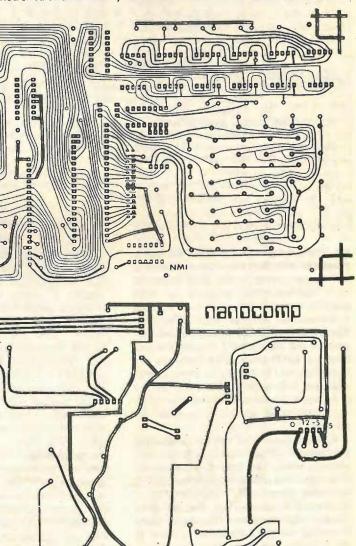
Assembled printed circuit board and layout details. The board measures 200 x 120mm
